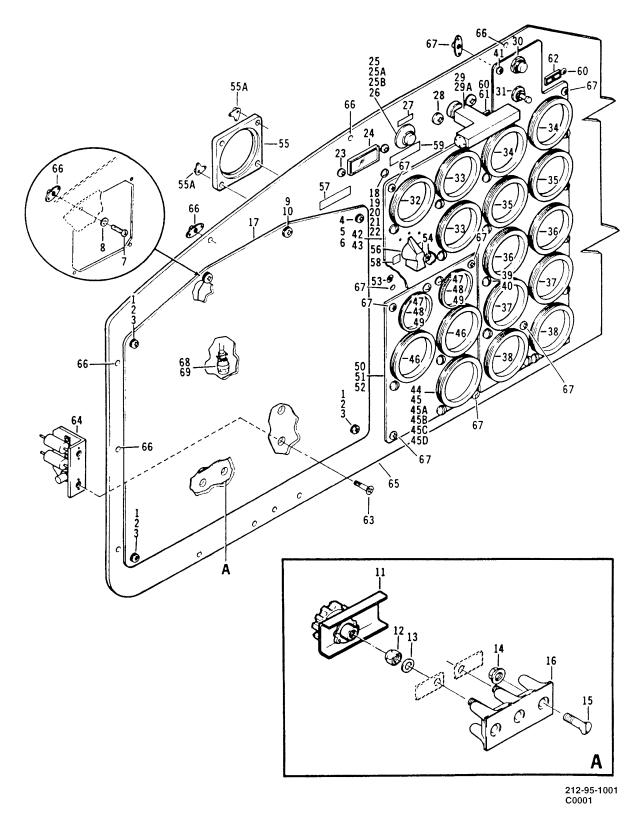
Panel assembly, instrument (30504 thru 30596, 30604 thru 30610)
